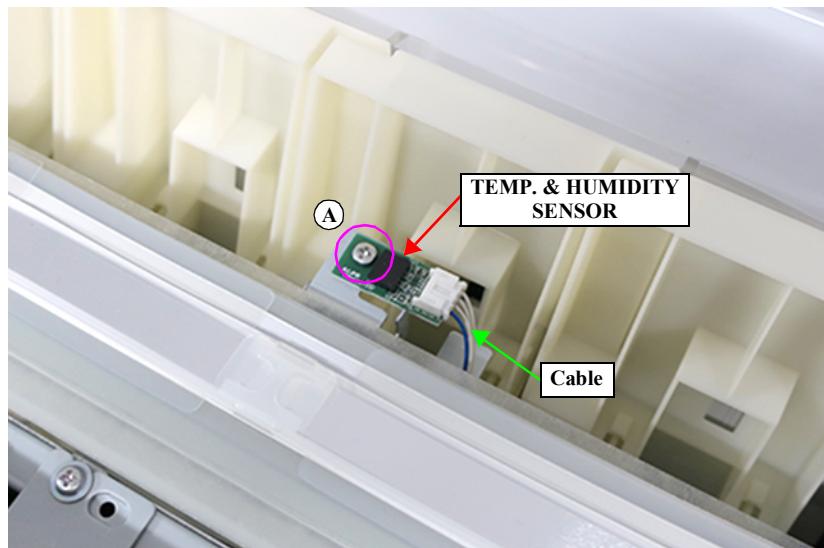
Removing the TEMP. & HUMIDITY SENSOR
